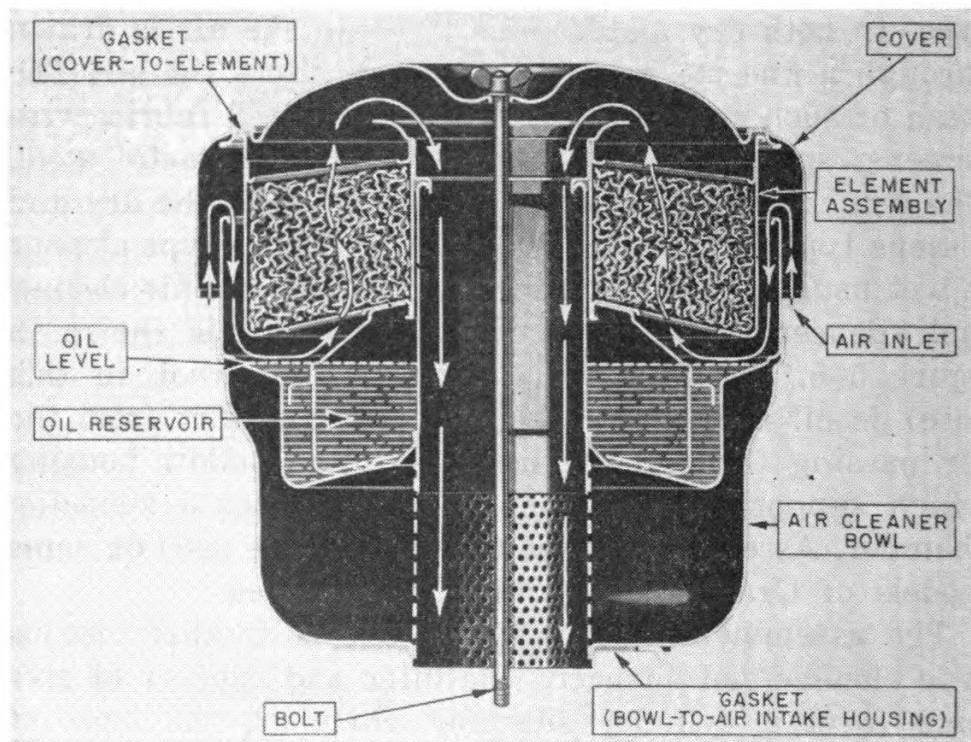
Oil bath air cleaner and silencer assembly (GM71).
